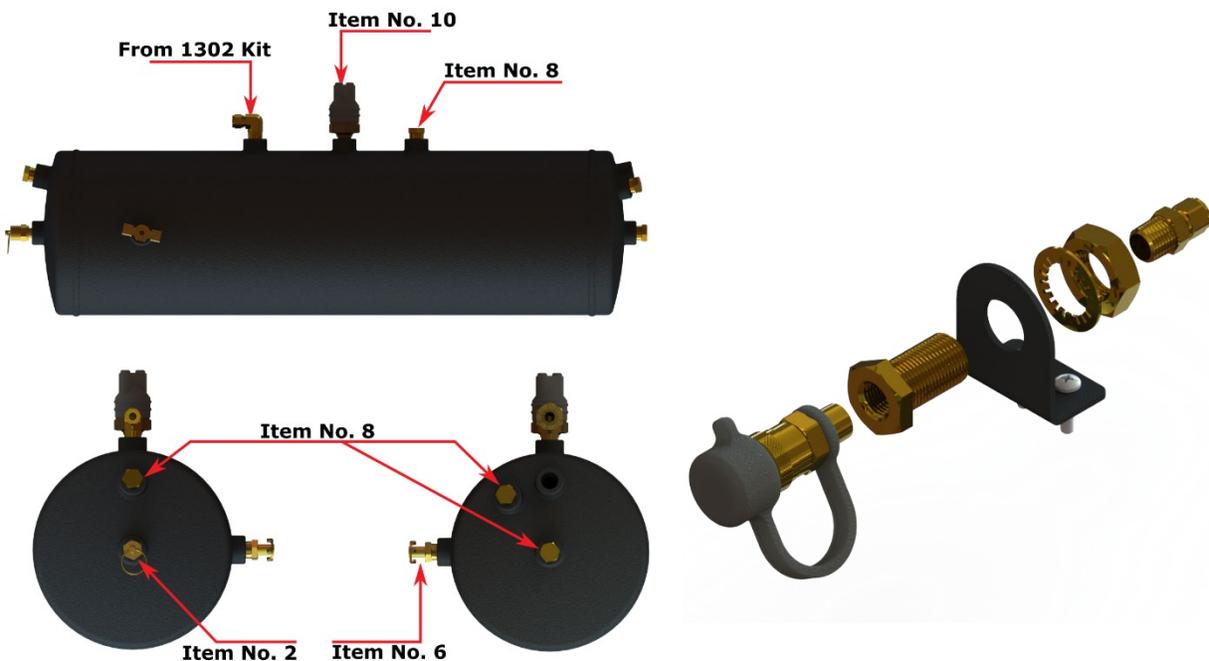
Air Tank Fittings & 1302 Quick Connect Kit
